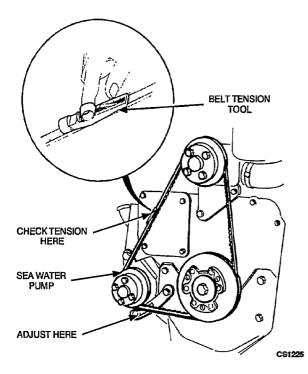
3. PUMP BELT ADJUSTMENT
